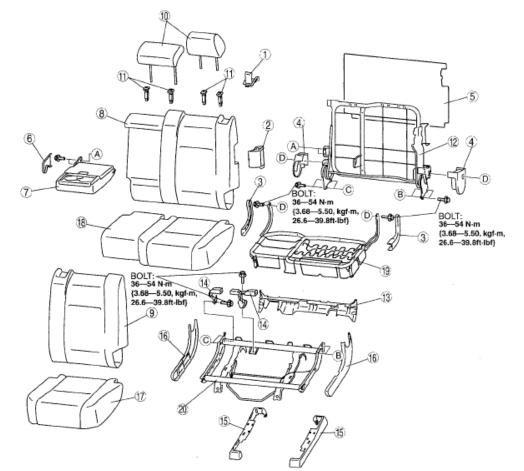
Identifying Second-Row Seat, Bolt With Cover & Torque Specifications Courtesy of MAZDA MOTORS CORP.
